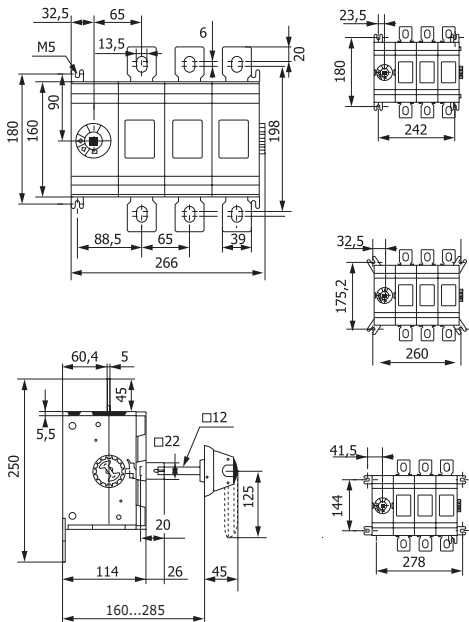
Overall and installation dimensions of 630-800 A 3P switch disconnectors
